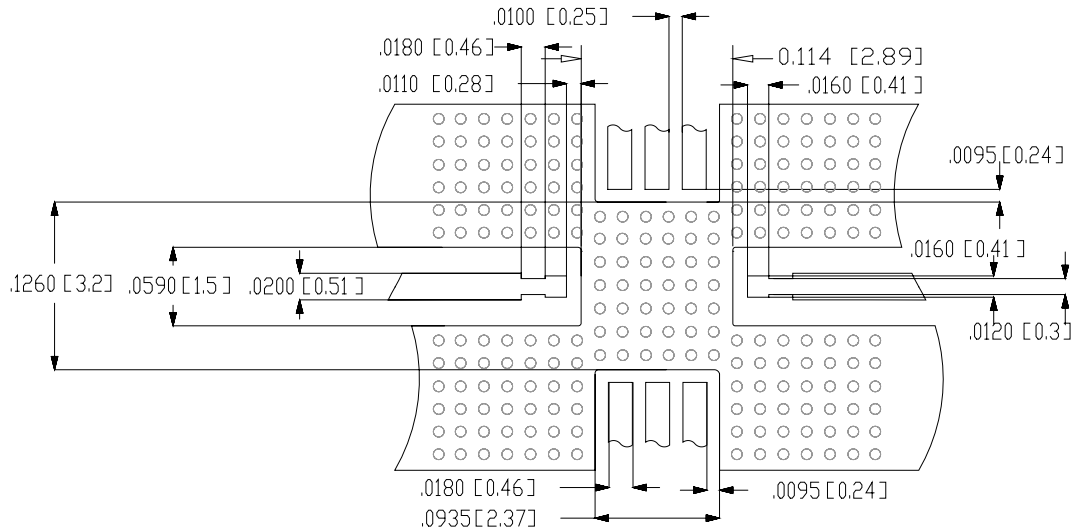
Suggested PCB Land Pattern and Stencil Layout
